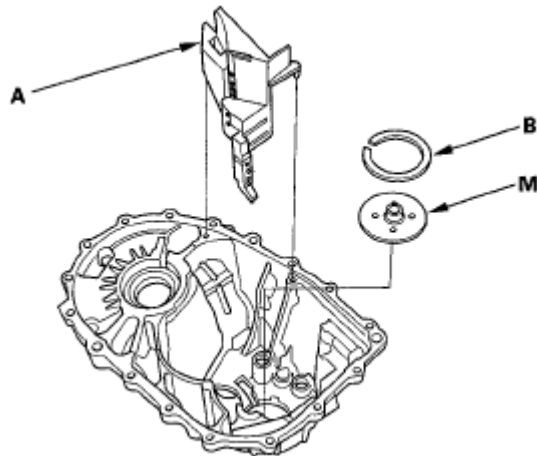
Identifying Oil Gutter Plate And Oil Guide Plate
